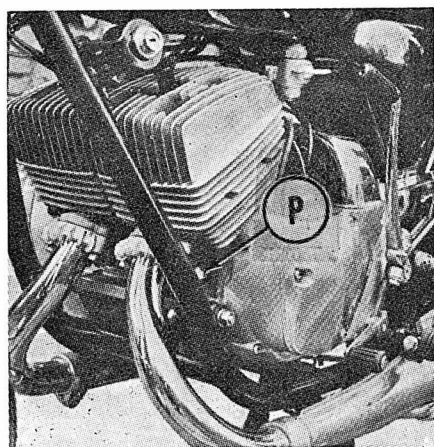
Ignition timing hole plug (P) is in the crankcase, behind the left exhaust pipe.
